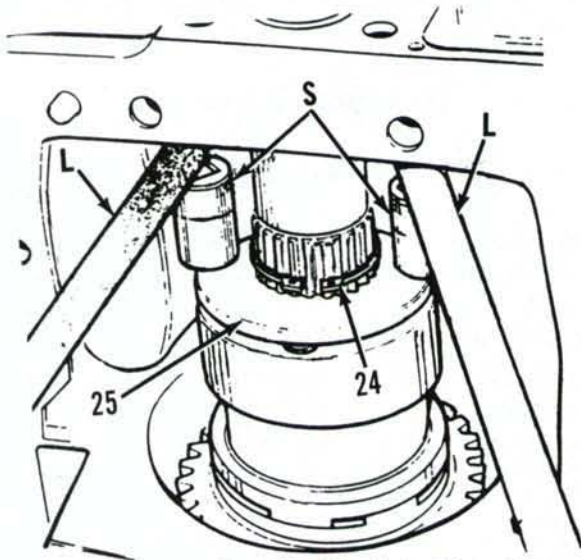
Use appropriate sized sockets (S) and levers (L) to press against spring keeper (25) so that snap ring (24) can be removed.
